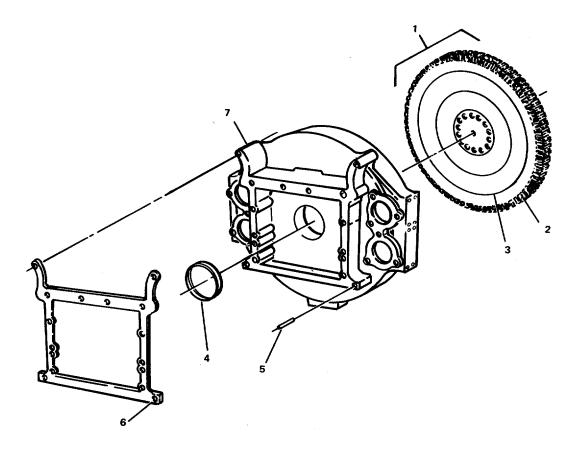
Flywheel Housing/Flywheel and Ring Gear Assembly.
